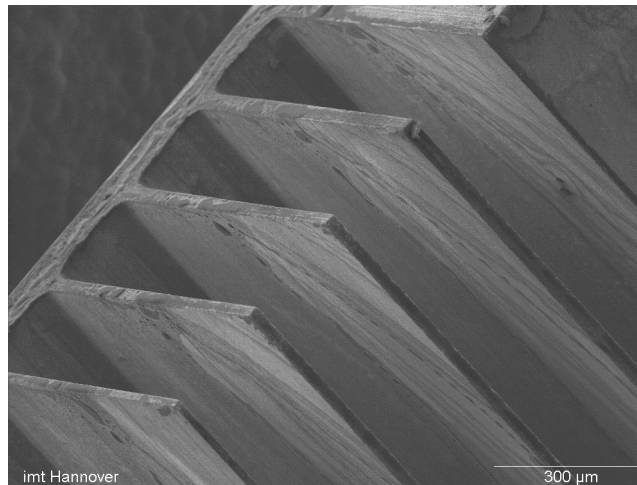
Test structures machined with a 45 μm diamond grit resinoid bonded dicing wheel
